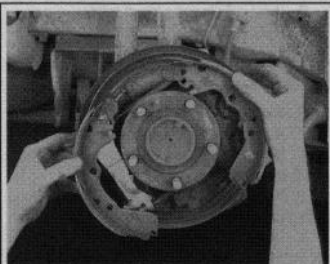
With the shoes attached by the spring, pull them apart to clear the hub and bearing . . .
